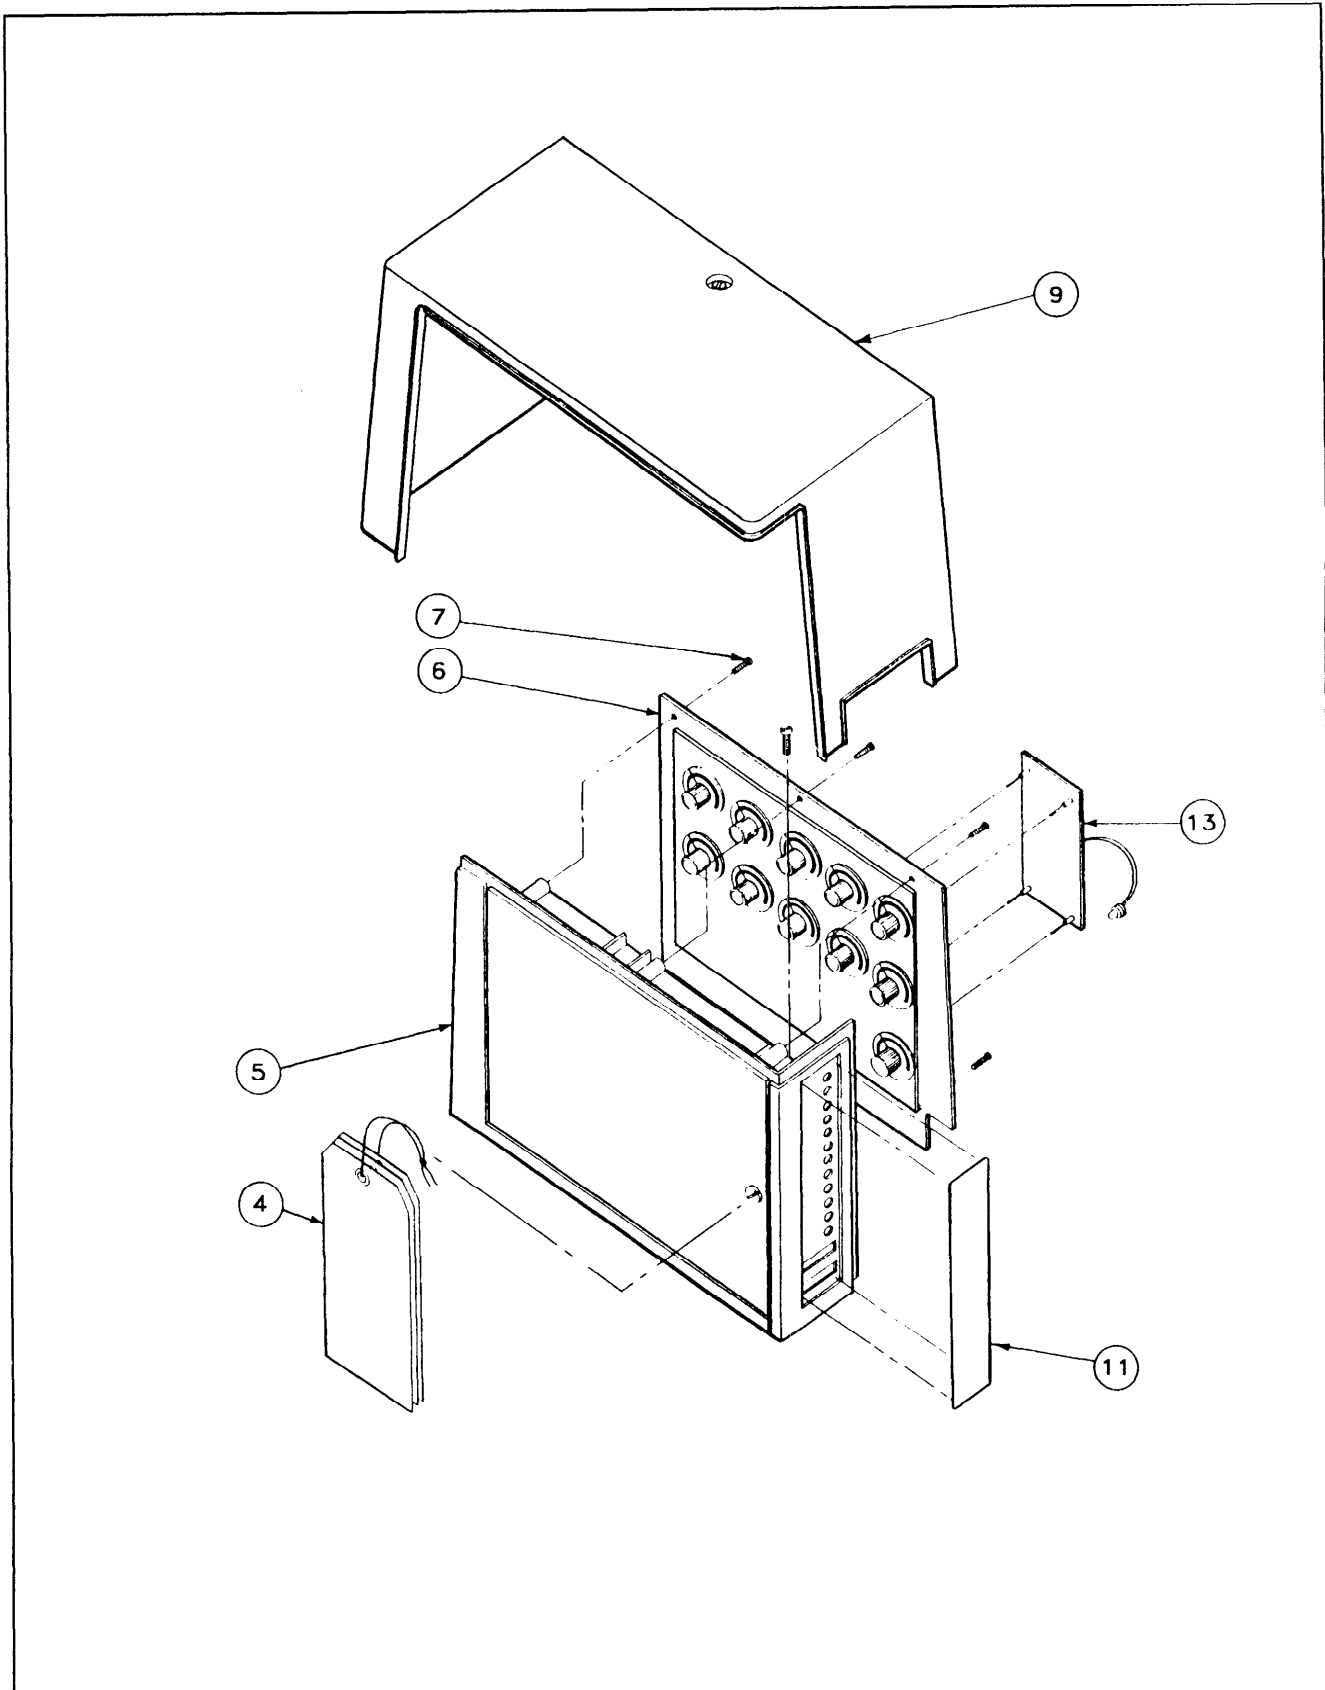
Series 2300 Unit Assembly (Drawing 1 of 2).
